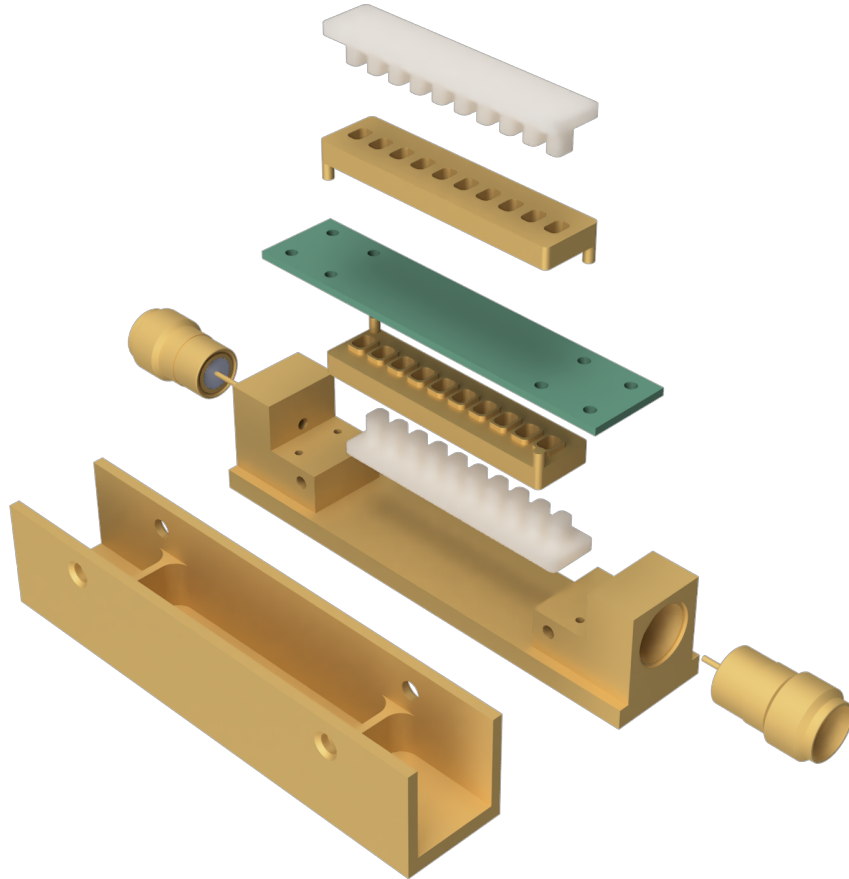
Exploded view of the HERD filter implemented in PCB technology with a dedicated package. Note that the screws and absorptive material are left from this image.
